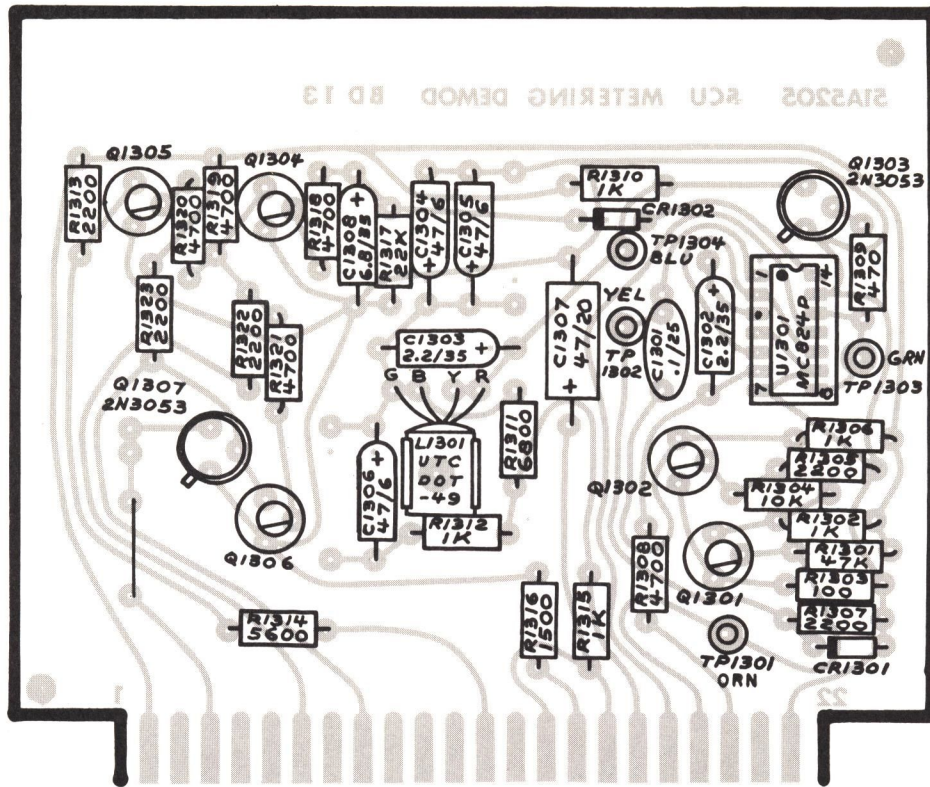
SCU Metering Demodulator (Board 13), Parts Location
